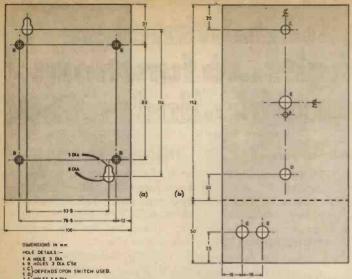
Metalwork drillings. (a) Keyhole slots on backpanel, for wall mounting. (b) Front panel. Hole sizes will depend upon switch types used.
